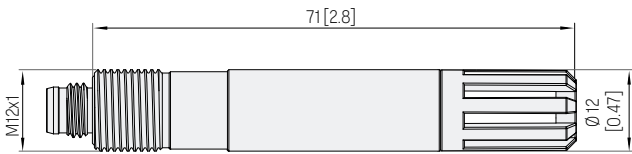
HMP60, HMP110, and HMP110T dimensions in mm [in]
